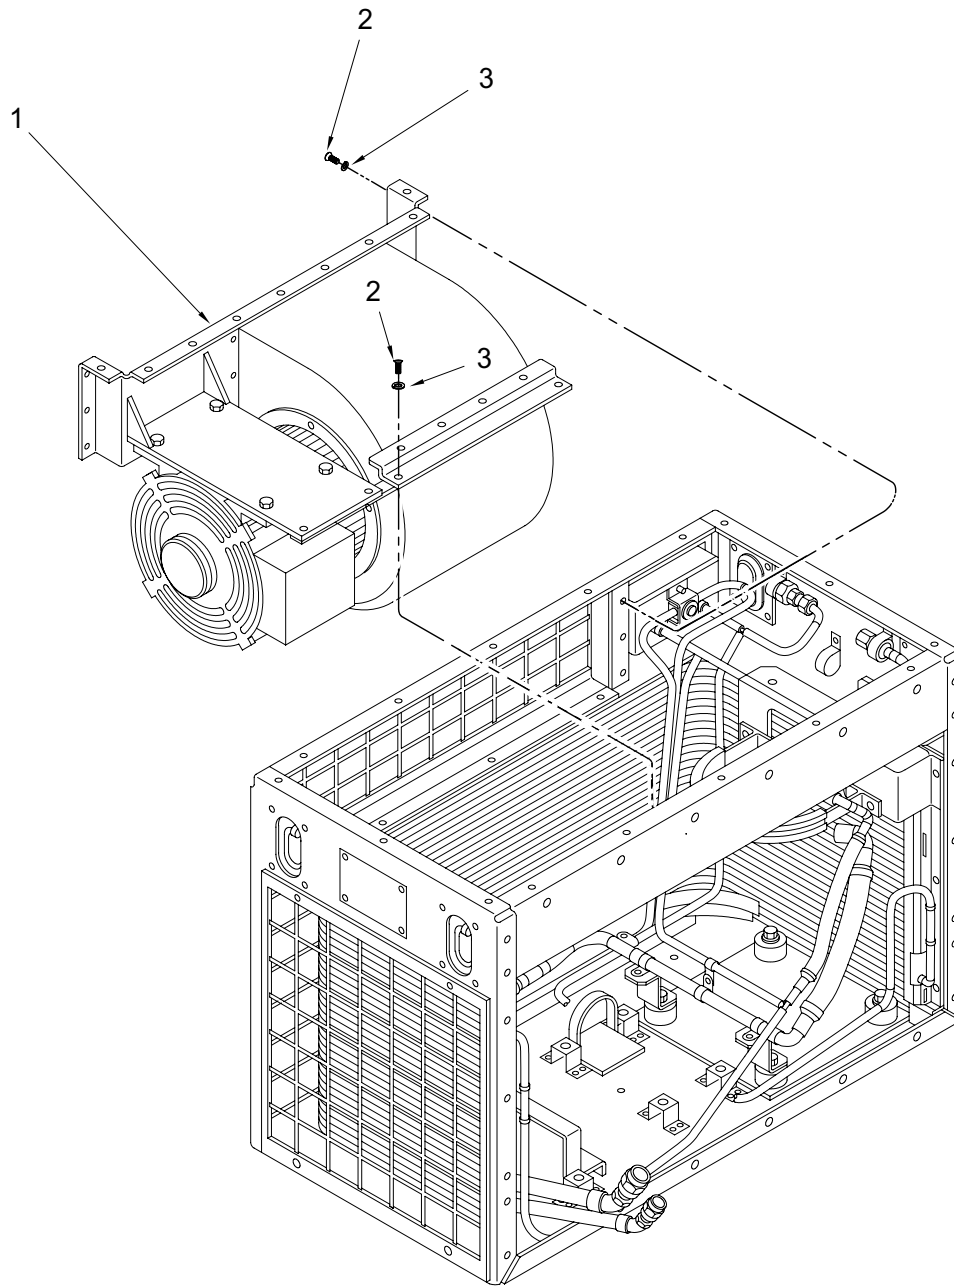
CONDENSER BLOWER AND MOTOR ASSEMBLY - LOCATION.
